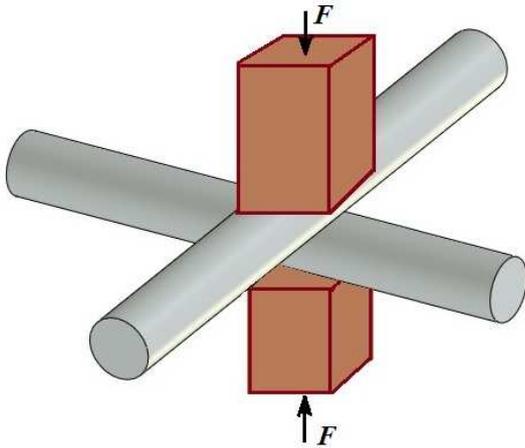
Illustration of spot resistance welding of crossed cylinders.
